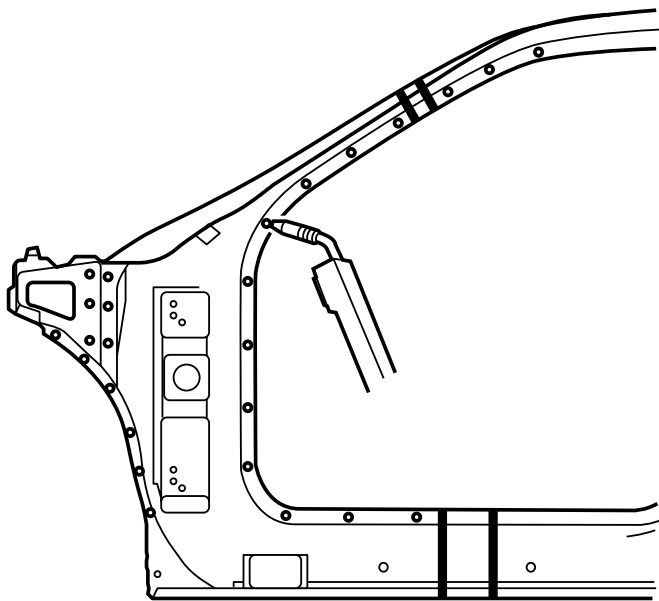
Plug Weld and Stitch Weld
